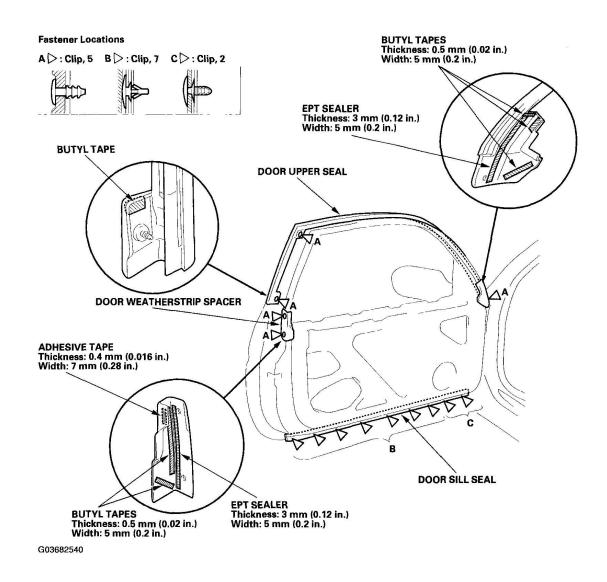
Removing Door Upper Seal, Door Still Seal And Door Weatherstrip Spacer
